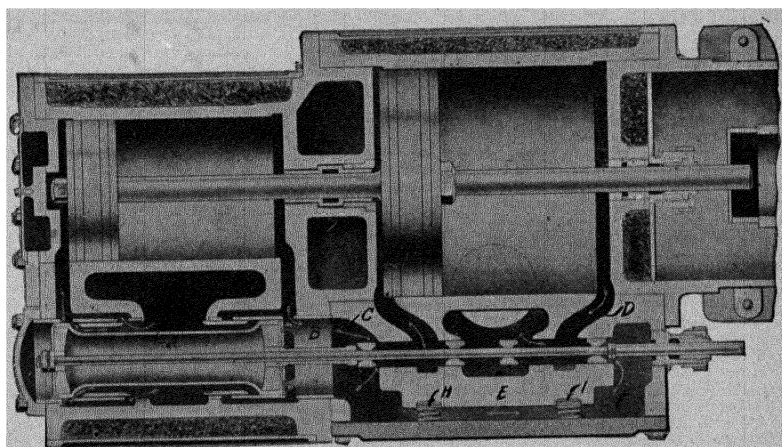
Obtaining Perfect Balance by Use of Double-Ported Piston Valve and Double-Ported Slide Valve in Compound Engine
